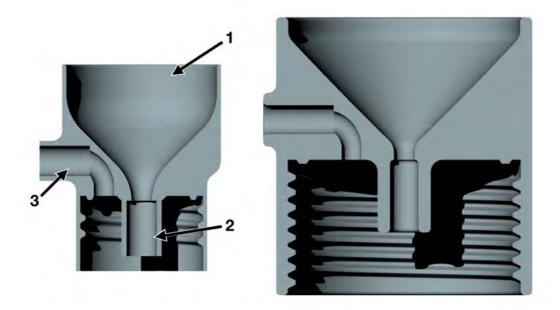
Cutaway view of the 3D printed bottle caps, with funnel (1), offset formed vent tube holder (2) and central inlet tube holder (3) (Left, cap for 225 ml bottles, right, cap for 2 L bottle).
